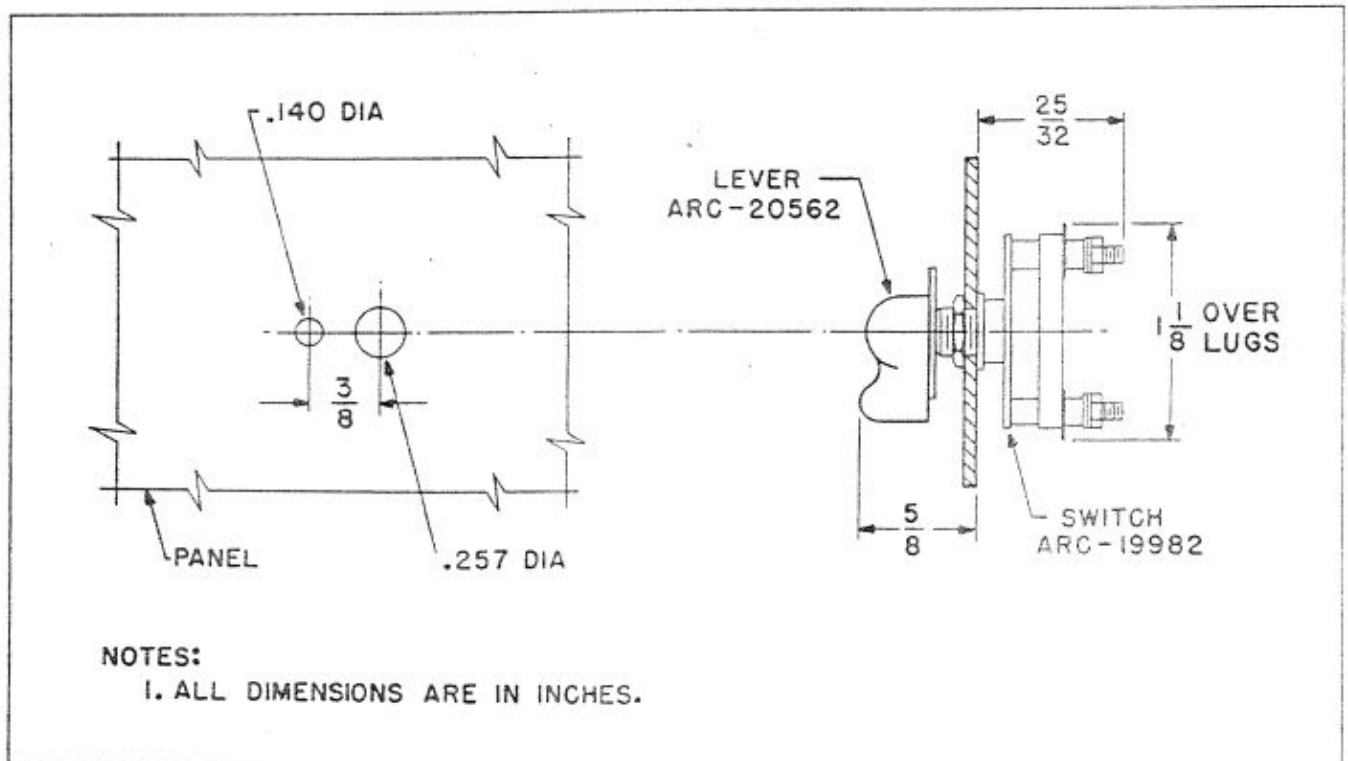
Panel Mounting Dimensions for Installation of Function Switch in Custom Control Panel
